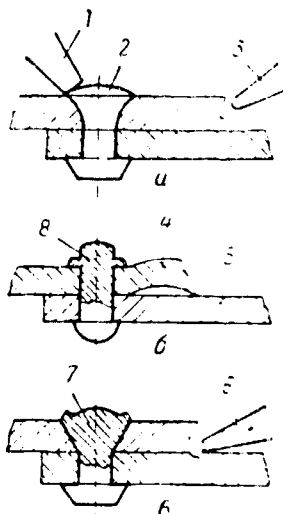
Defects Developing During the Chasing of the Edges. Consolidation (closing) of defective rivets: 1 - calking tool for swageing the rivets; 2 - faulty rivet with sunken head; 3 - calking tool equipped with rounded striker for chasing the unscrapped edges; 4 - damage caused by excessive calking of edge -- the edge has been bent and formed a gap; 5 - sheathing sheet; 6 - improper position of calking tool -- acute angle downward, as a result, an undercutting of the edge to the sheathing's sheet; and 7, 8 - closing the rivets with intensive upsetting (swageing).
